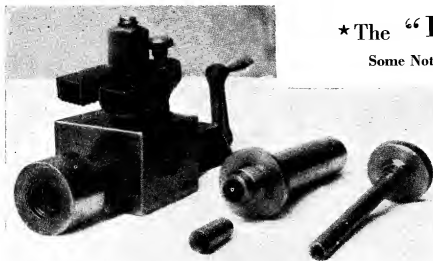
Special Pittler top slide (left-hand) with chuck adapter socket and hollow mandrel replica (centre) to adapt to the saddle socket and its worm drive.
